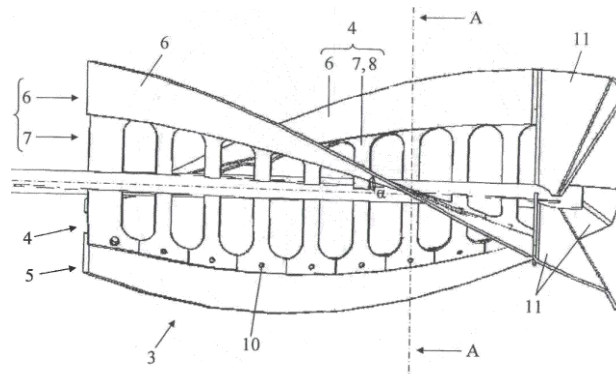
Is a side elevation view of a tree destemming as shown in FIGS 1 and 2;
